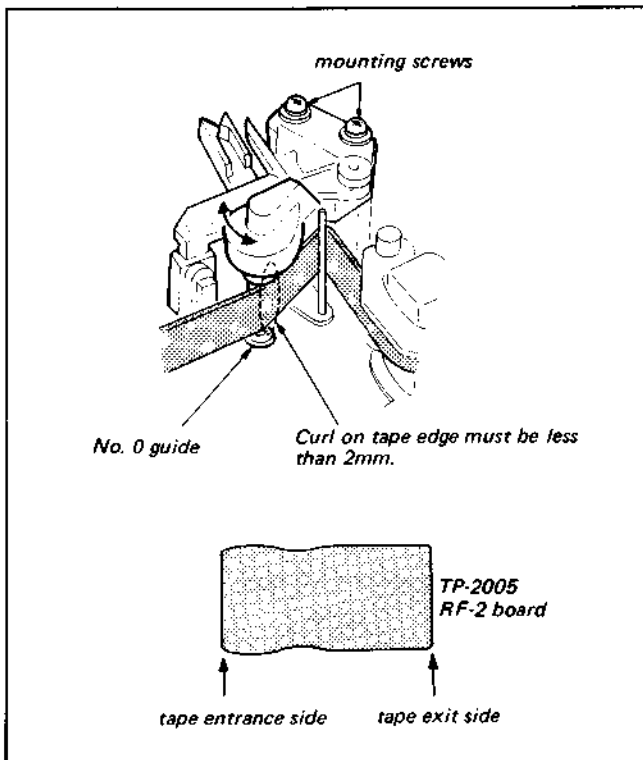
Position adjustment of No.0 guide section assembly mounting
